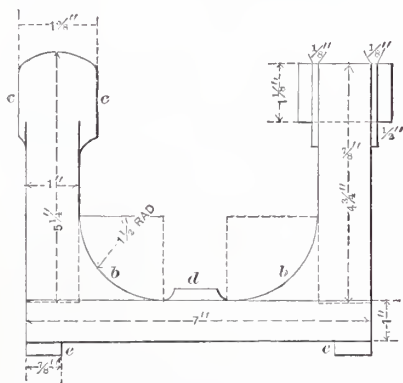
Detail of Headstock.—Scale, 3 Inches to the Foot.
